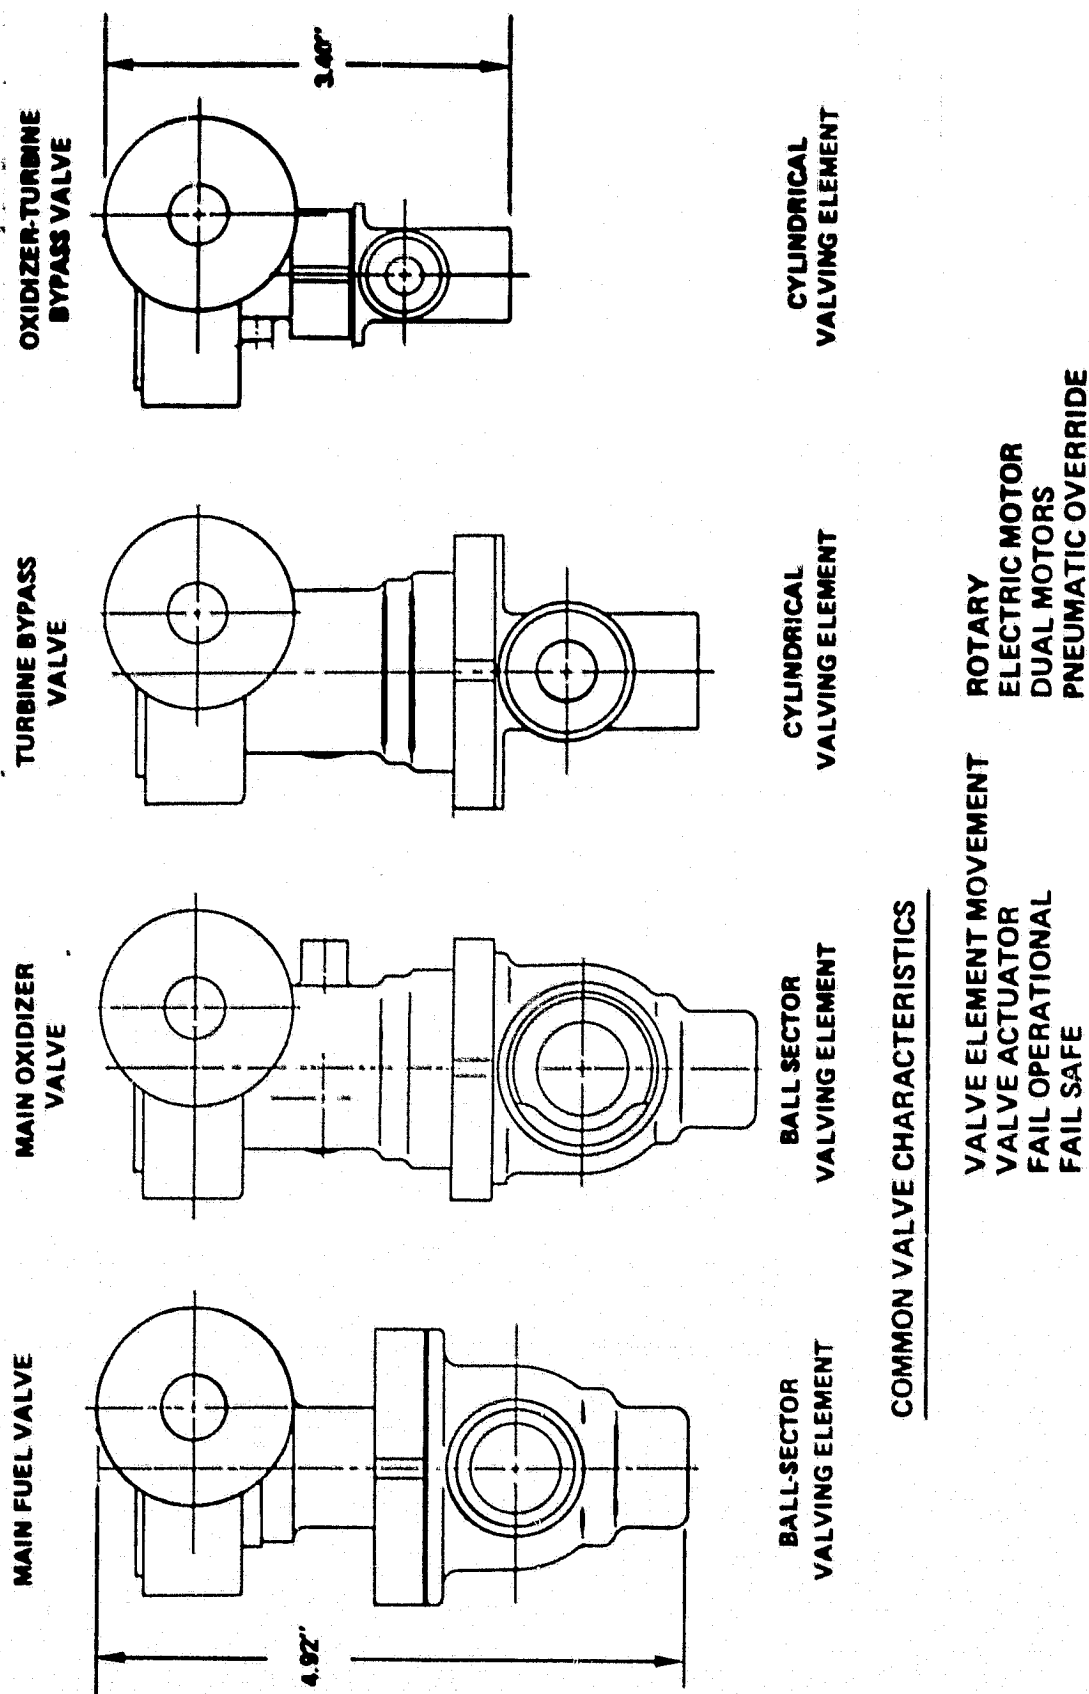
Primary Valves, Advanced Expander Cycle Engine Point-Design
